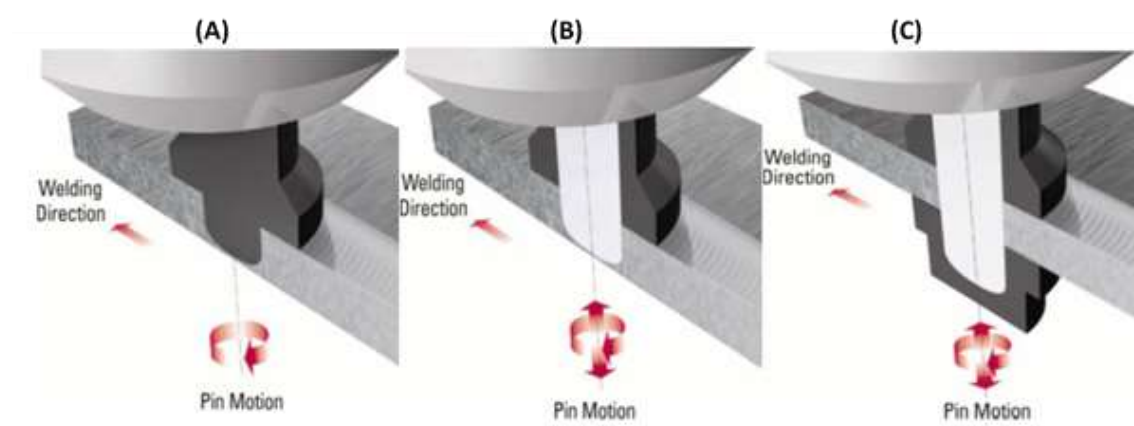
Friction stir welding pin tool types [22].
